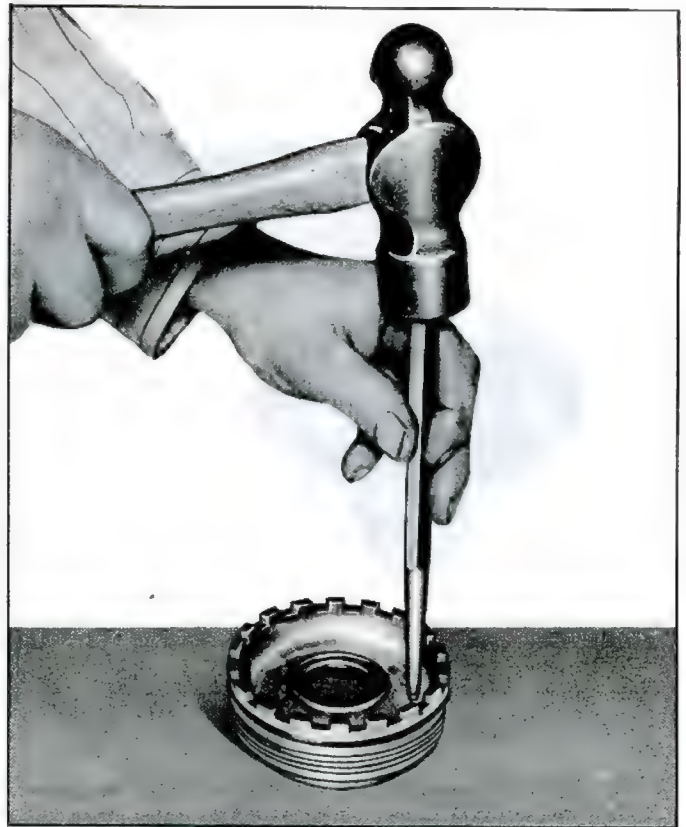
Sealing Drilled Holes in Adjusting Sleeve with Lead Balls
